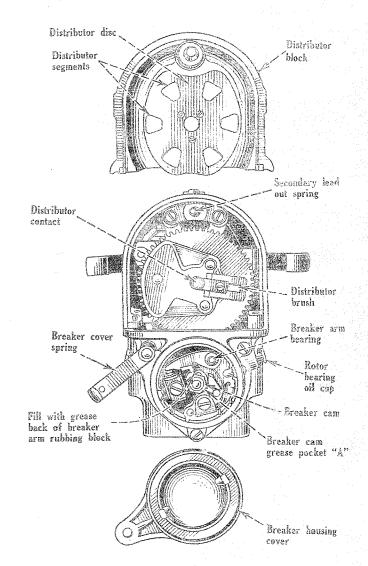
B. Detail of Magneto Distributor and Breaker Mechanism
